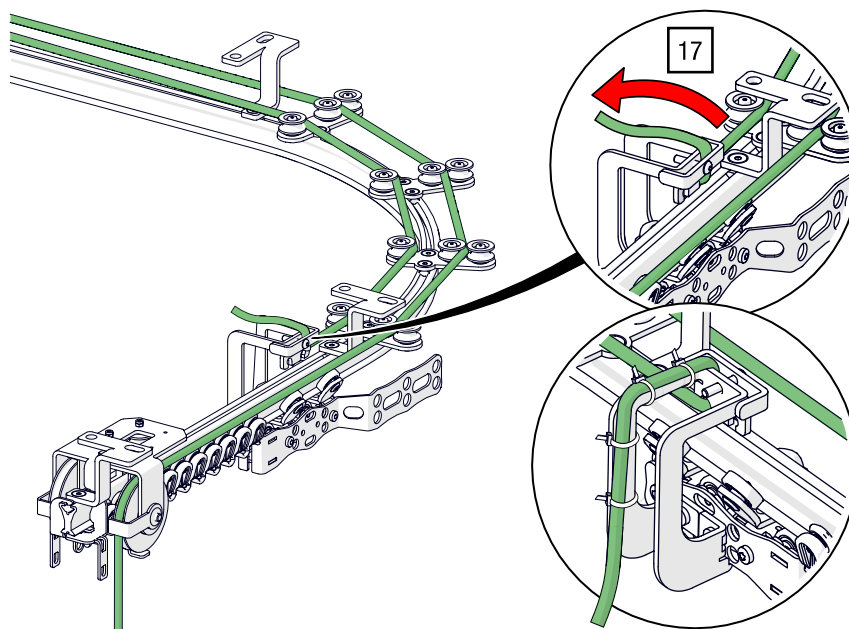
Top cord operation – Insert cord end into master runner on one side
